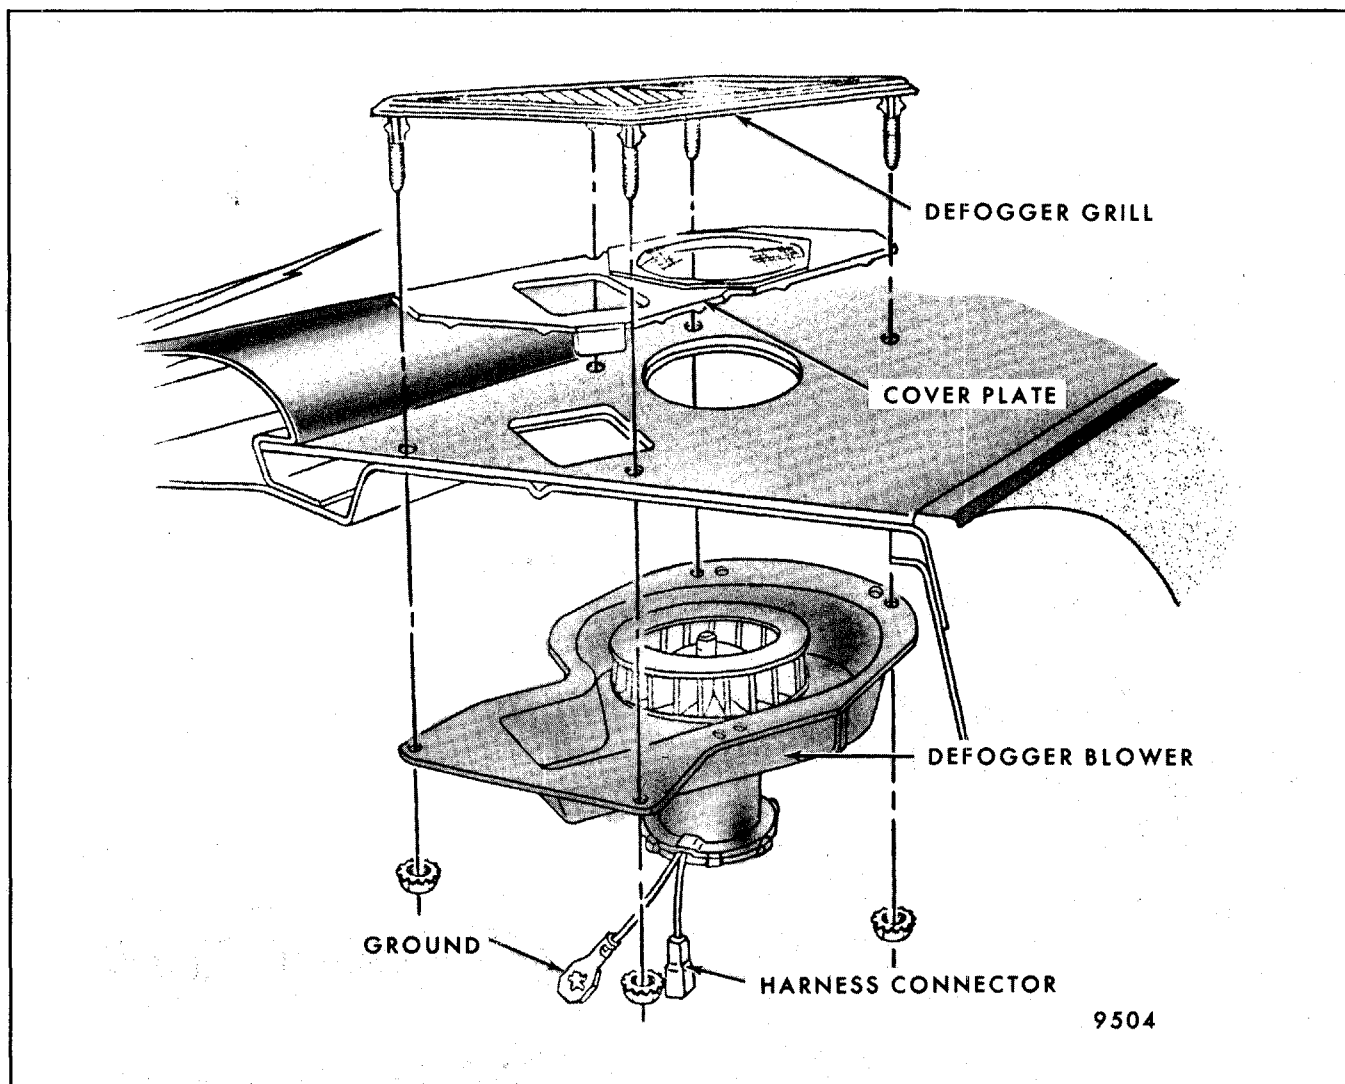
"X-27-69" Defogger Blower Installation
